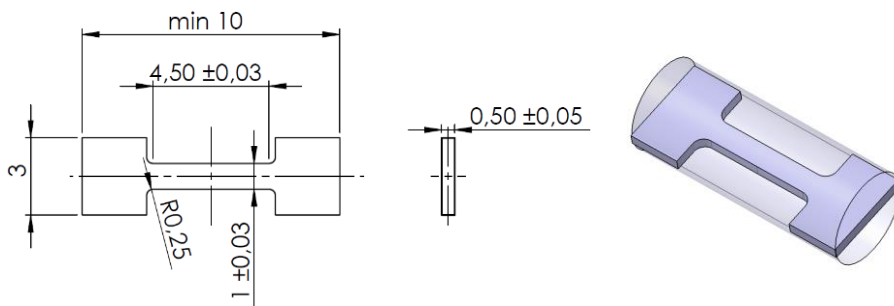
Mini tensile test specimen dimensions (left) and their cutting from the cylindrical dilatometer sample (right).
